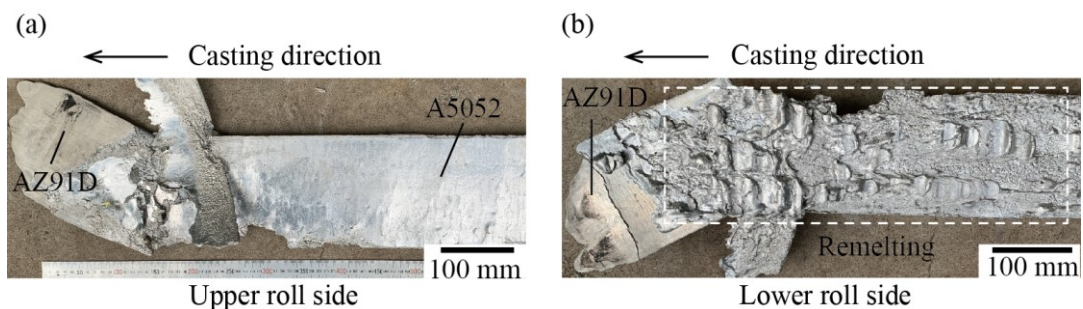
Surfaces of the A5052/AZ91D clad strips at a roll speed of 9 m/min
